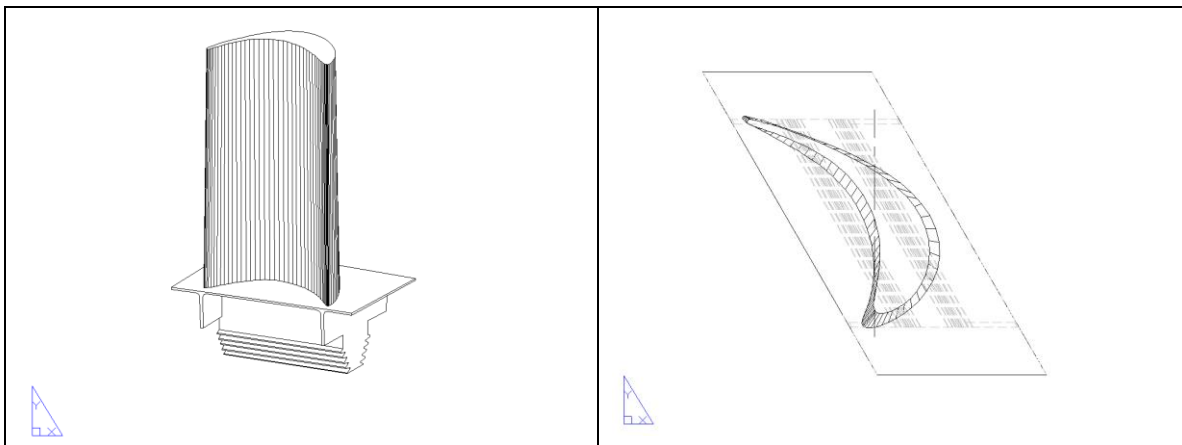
CAD design of rotor blade and root for mechanical analysis.
